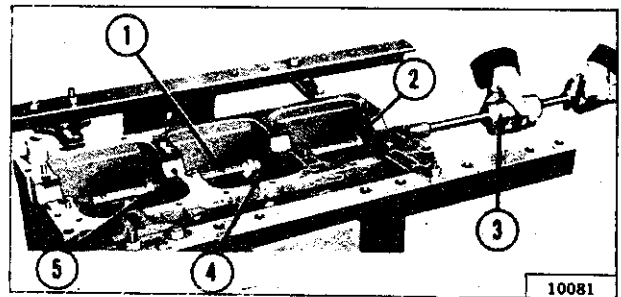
INSTALLING CAMSHAFT BEARINGS
